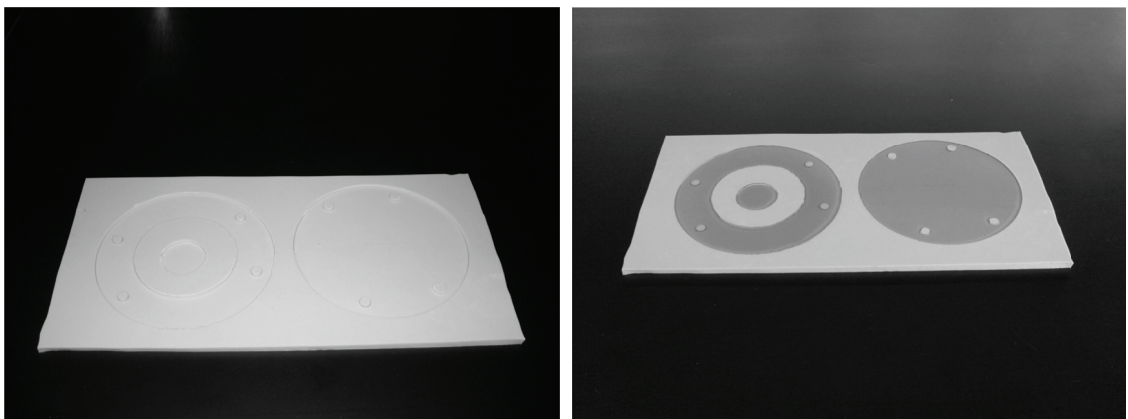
(left) Fabricated mold for ASTM 4935 (right) Mold filled by fabricated sample (epoxy)
